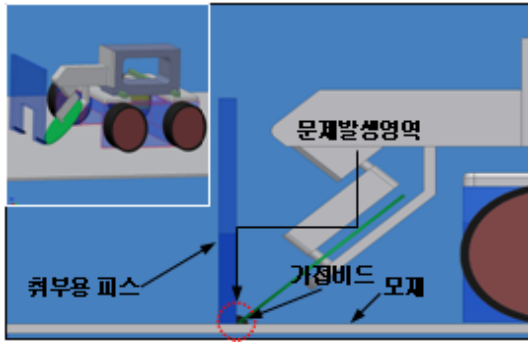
OZ(Operational Zone) of Welding Bead Removing System
